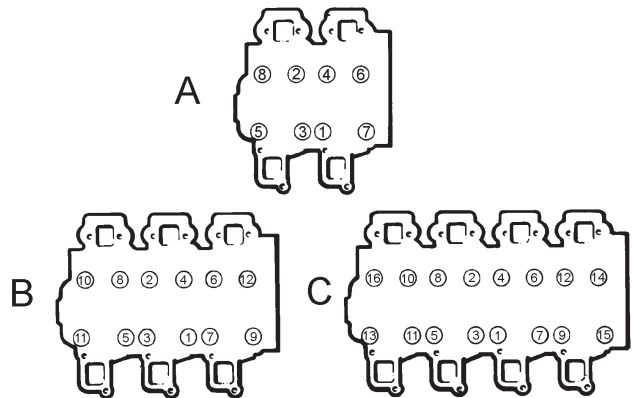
Cylinder Head Bolt Torque Sequence
